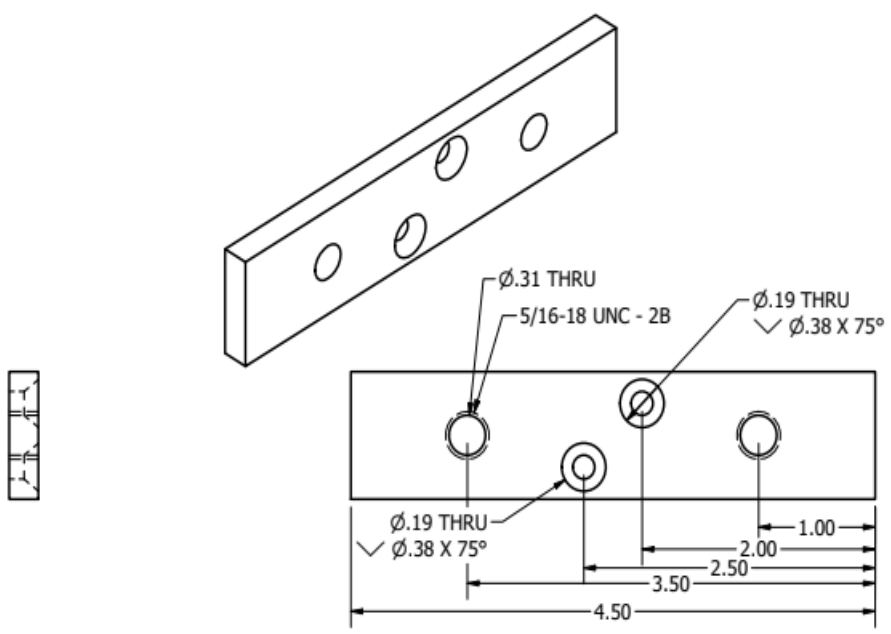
Aluminum facepiece for mounting structure. Threaded holes were drilled to reinforce the clamping of the leaf springs.
